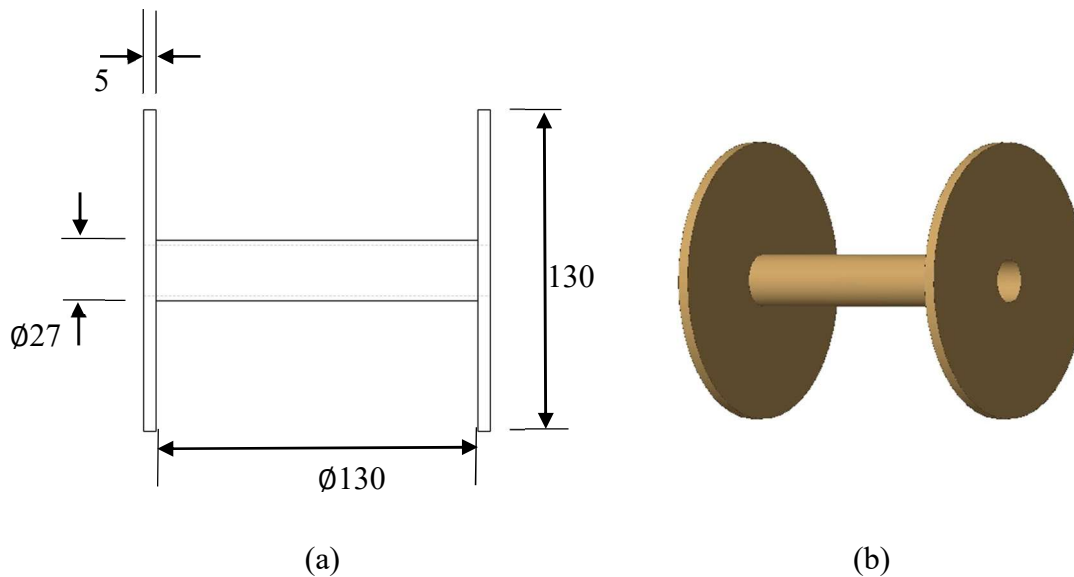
Bobbin (a) drawing and (b) CAD model, all dimension in (mm)
